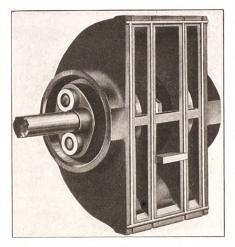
FACE OF CAGE, SHOWING ARRANGEMENT OF PACKING
